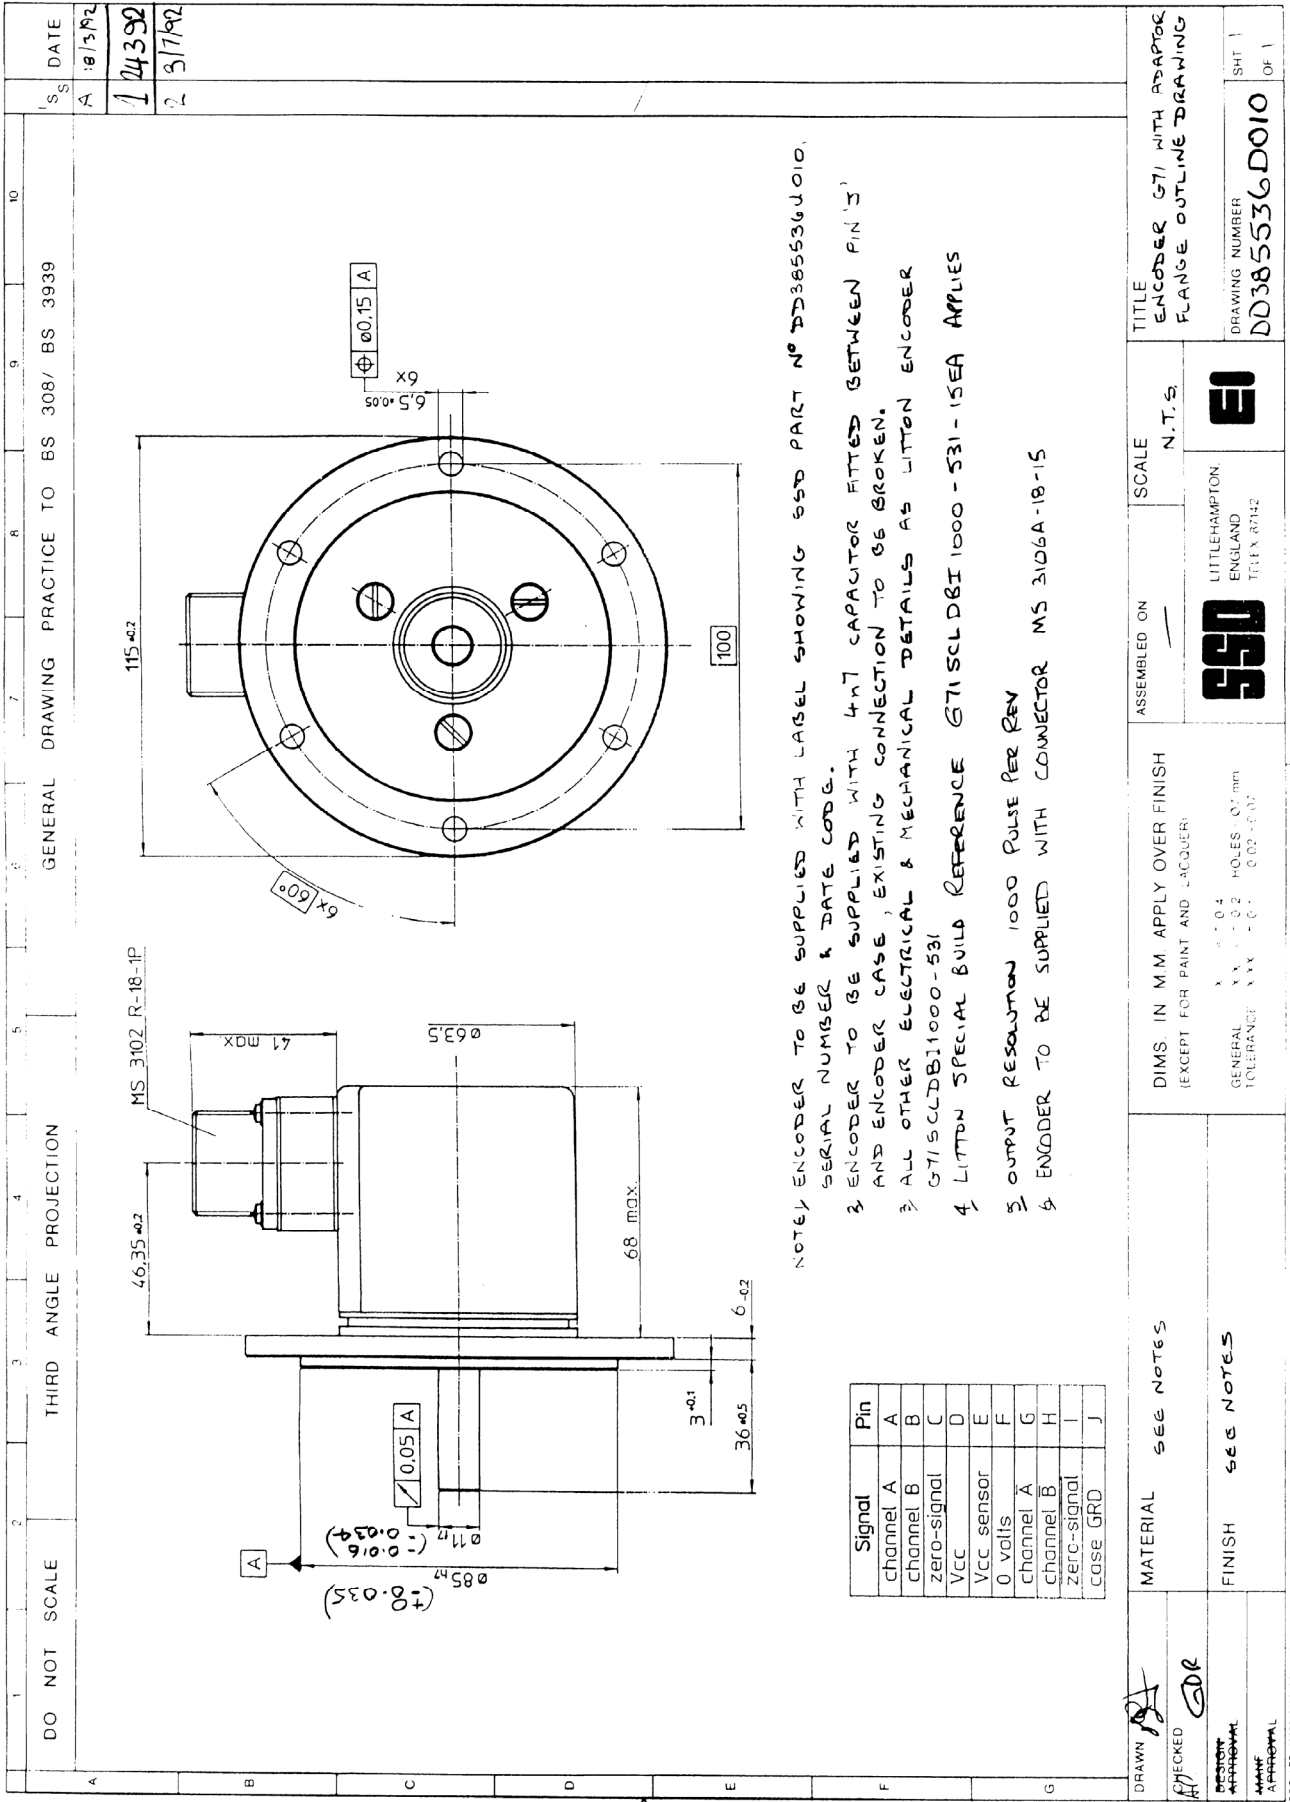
Outline Drawing of Encoder with Adaptor Flange
